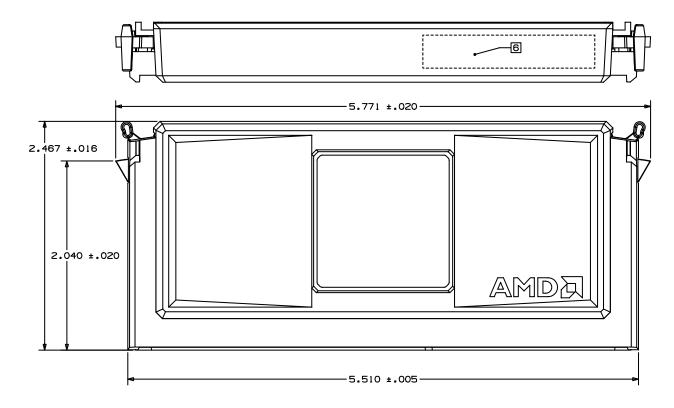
AMD Athlon™ Processor Module Dimensions – Front View
